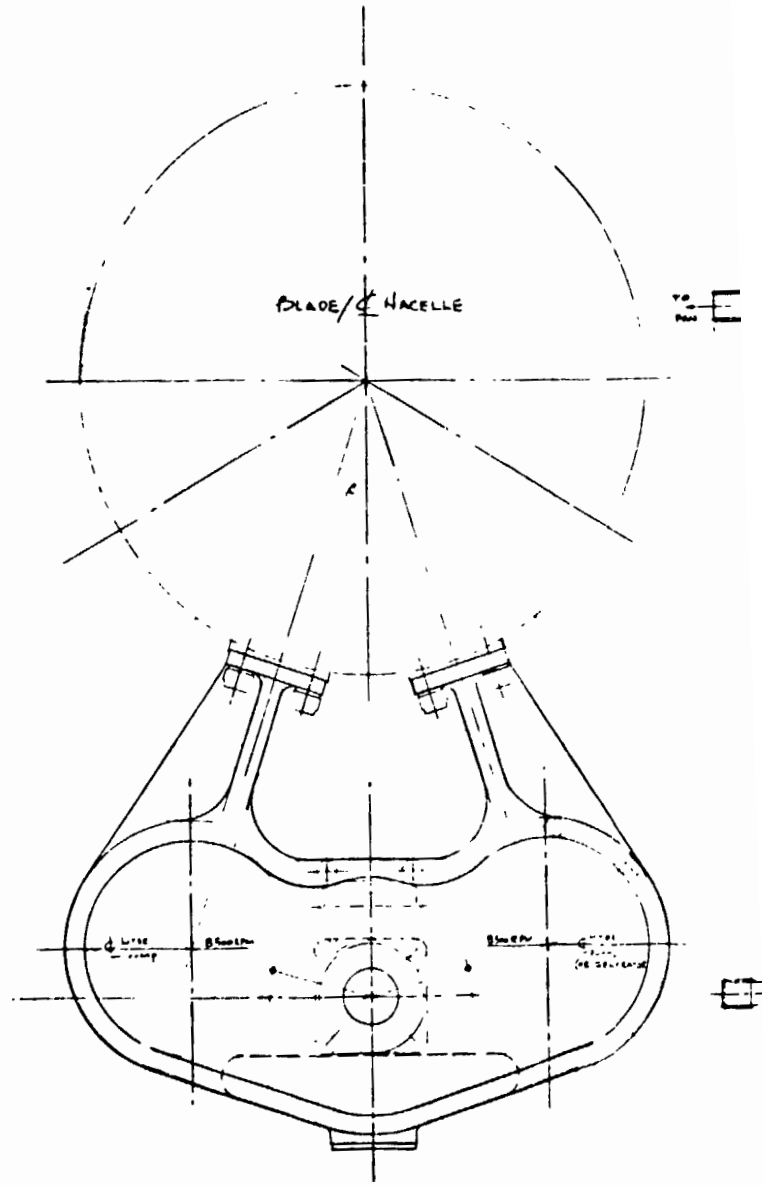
ACCESSORY GEARBOX WITH FAN-COOLER SYSTEM - HTR XV-15
